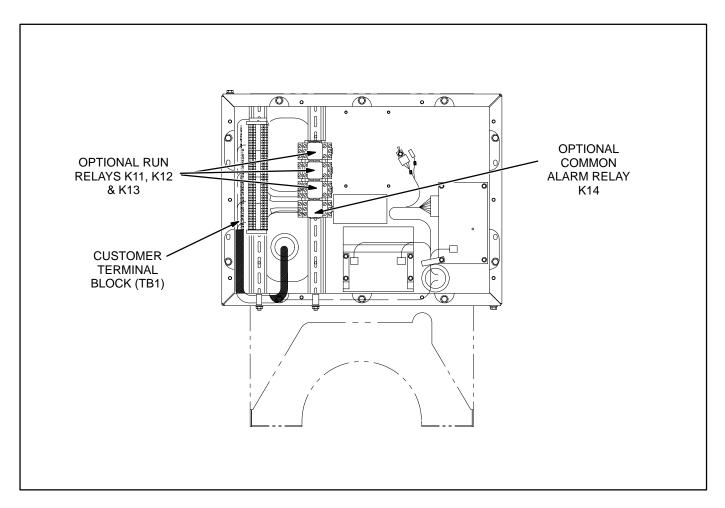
ACCESSORY BOX COMPONENTS
